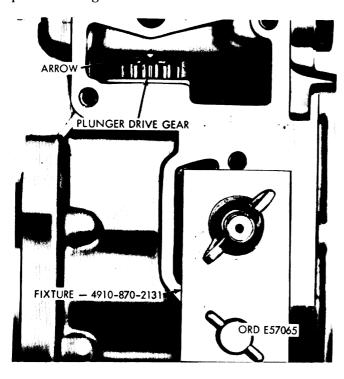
Locking camshaft using fixture-4910-870-2131.
